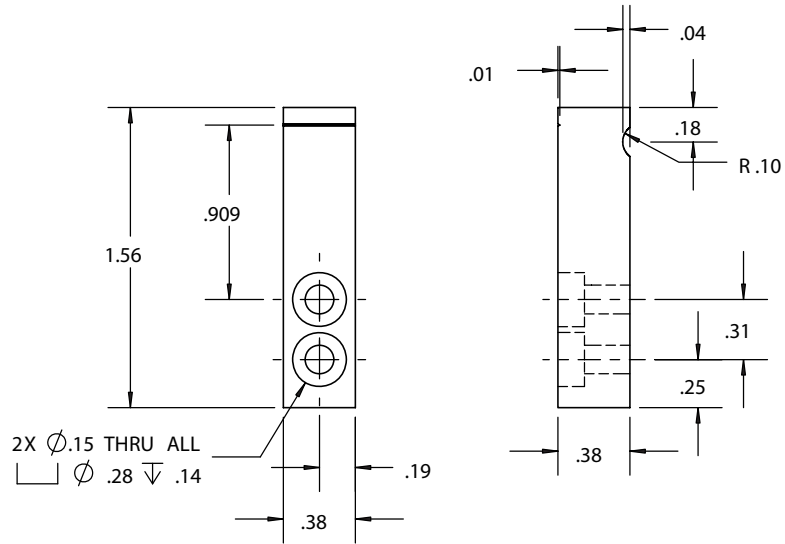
Drawing of the extensometer mount. Dimensions in inches unless otherwise noted.
